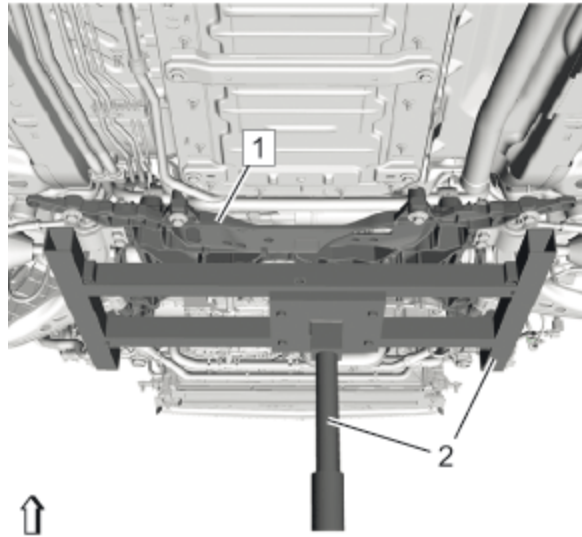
Drivetrain And Front Suspension Cradle Supported With Suitable Hydraulic Jack
